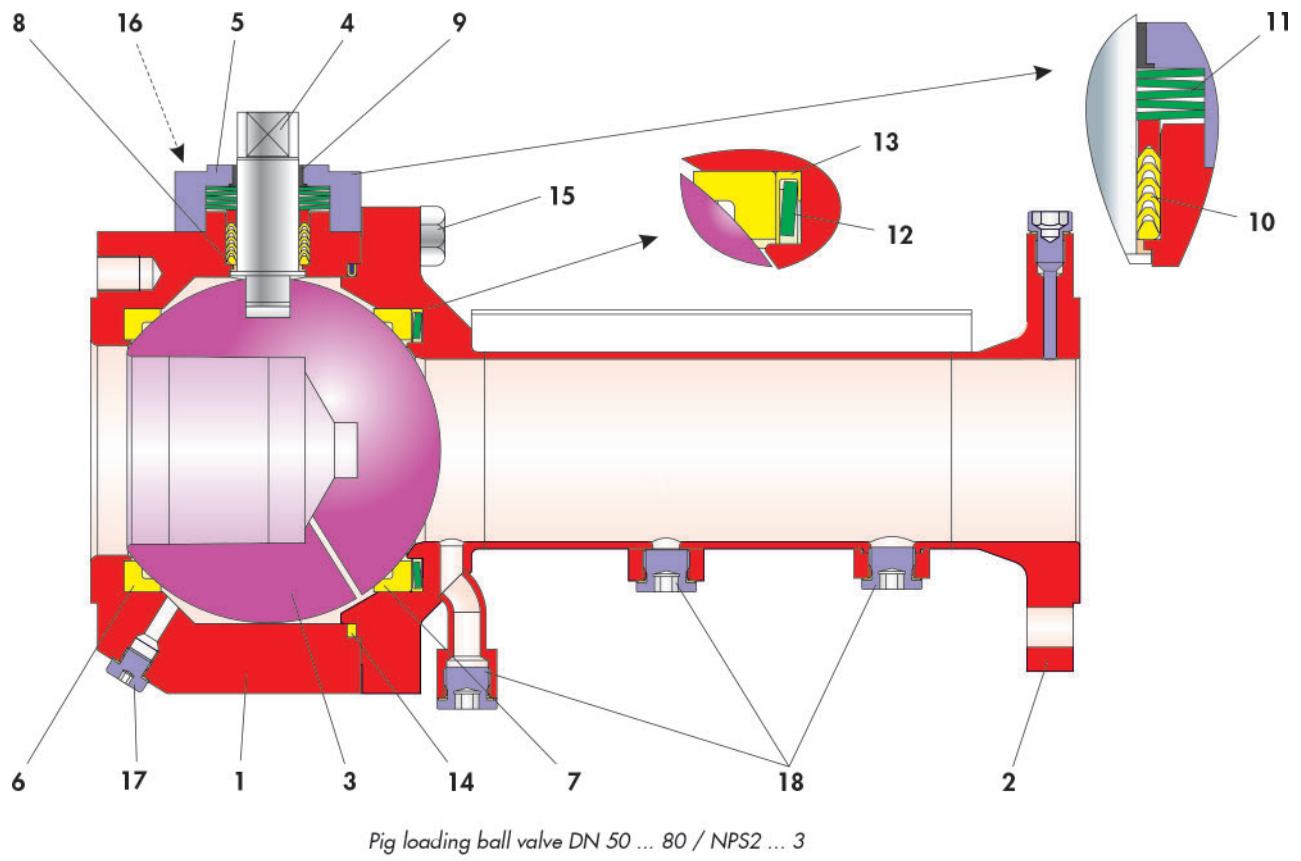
Sectional drawing of the BR 28e Pig loaded ball valve
